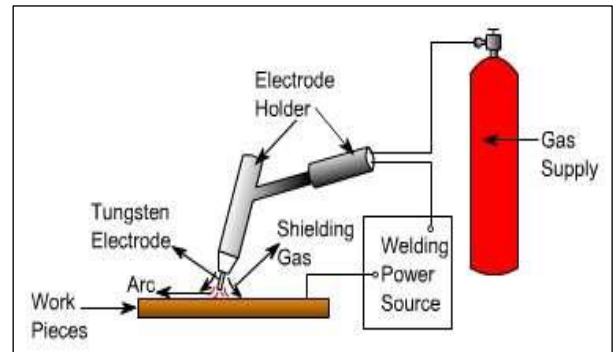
Schematic Diagram of TIG Welding System^[1]
